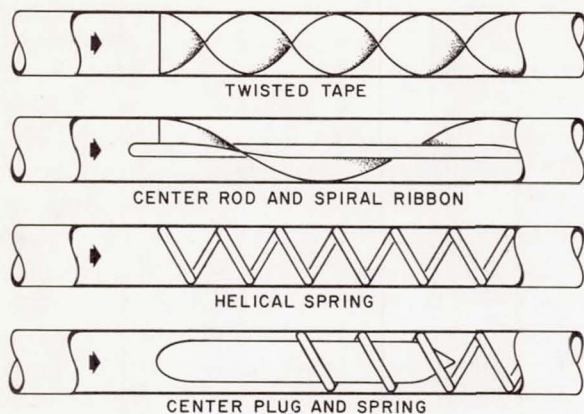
Centrifugal types of boiler tube inserts.
